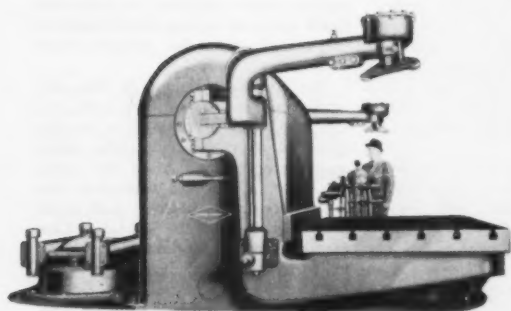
Man in background indicates the size of this huge jolt rockover machine for making large molds.
